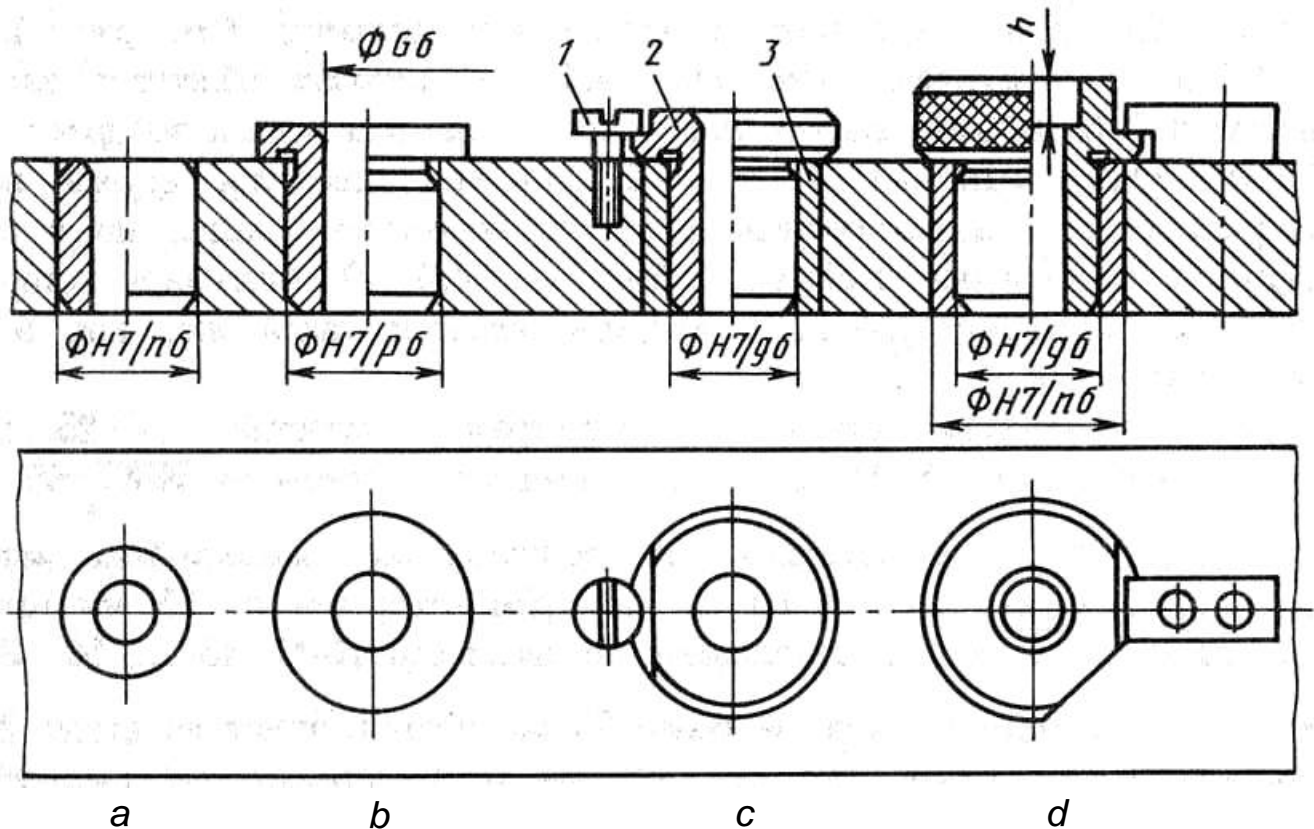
Standardised drill bushings: a – permanent without shoulder; b – permanent with shoulder; c – changeable; d – quick-change
